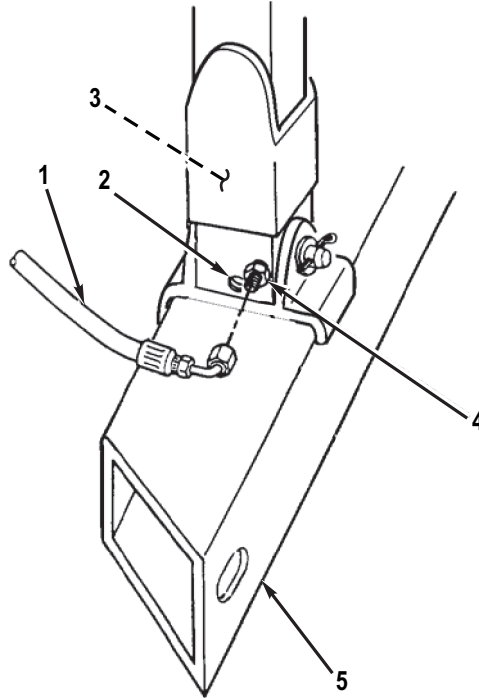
Secure Hydraulic Control Valve-to-Hydraulic Positioning Cylinder Hose Assemblies.
